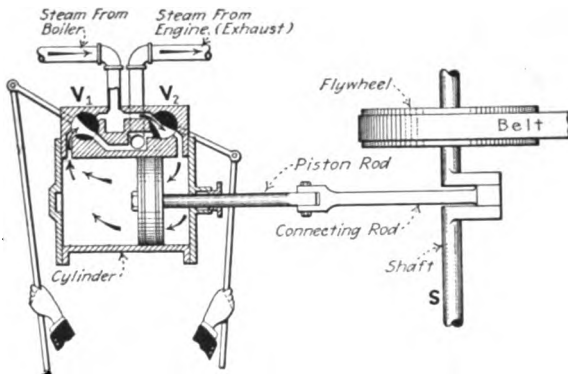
Section through cylinder of engine with hand-operated valves.
